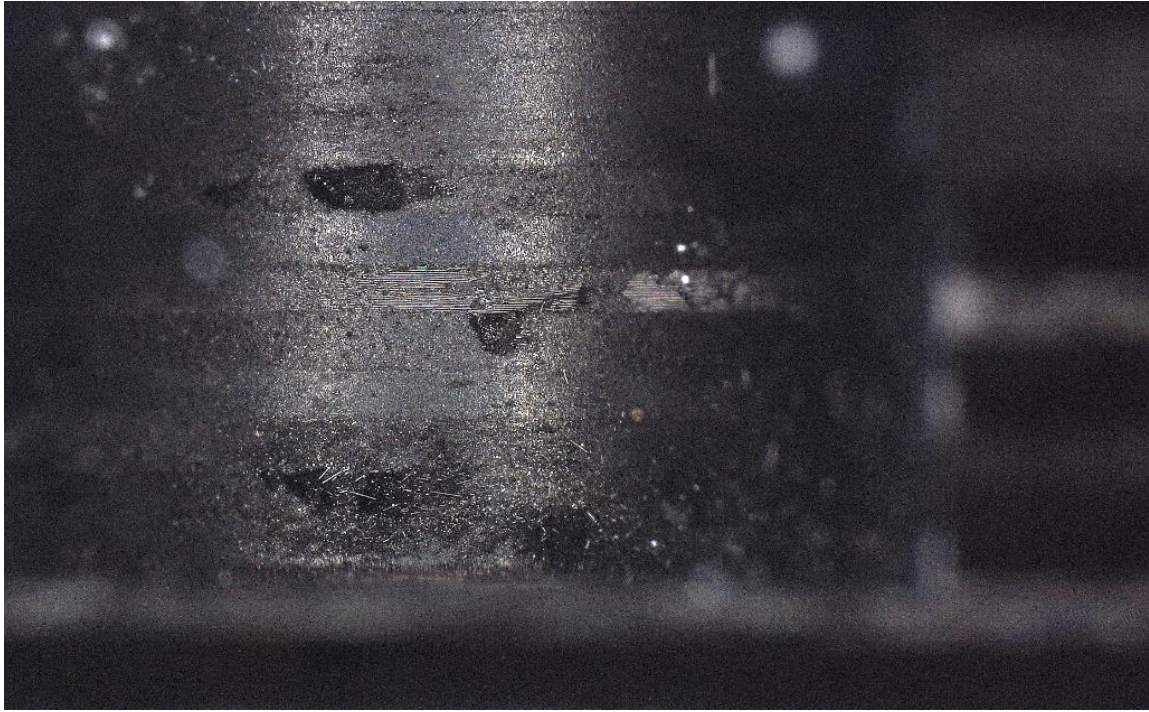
Micrograph of composite debris trapped inside Hole NV-03 after drilling. Drilling parameters: Pecking rate: 0.01 in/pec, spindle speed: 2500 rpm, cutting speed: 0.33 peck/s. Tools used: Amamco TDR chased by an End Mill.
